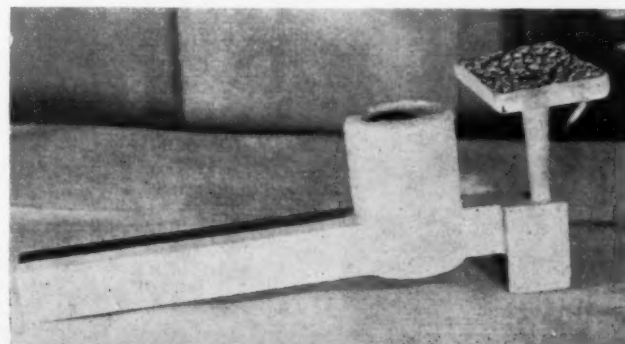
Photograph of test casting after sand blasting and identifying marks have been applied.
